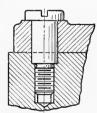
For heavier covers, the stud is shouldered and the casting counterbored.
